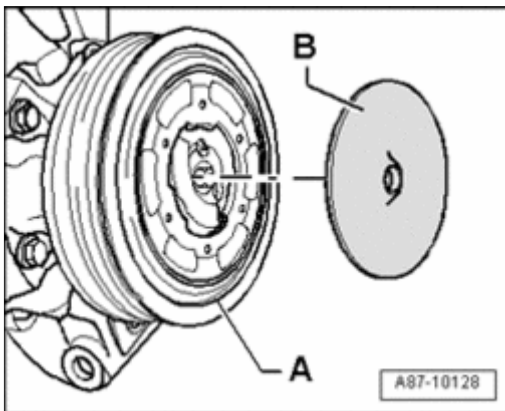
Identifying Plastic Disc, And Belt Pulley
